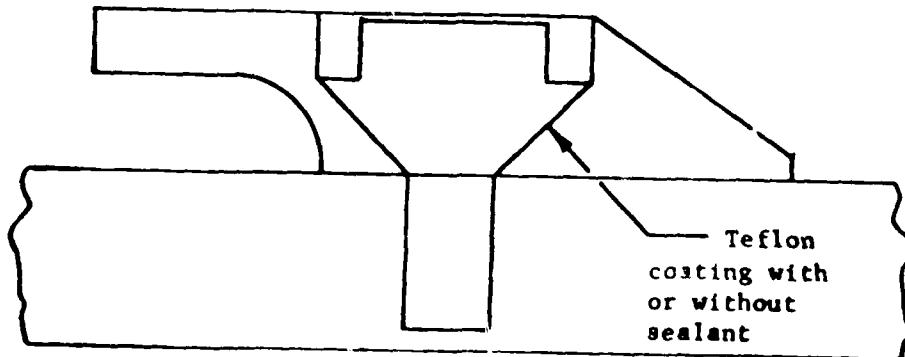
Proposed bridle track arrester bolt with countersunk head.
